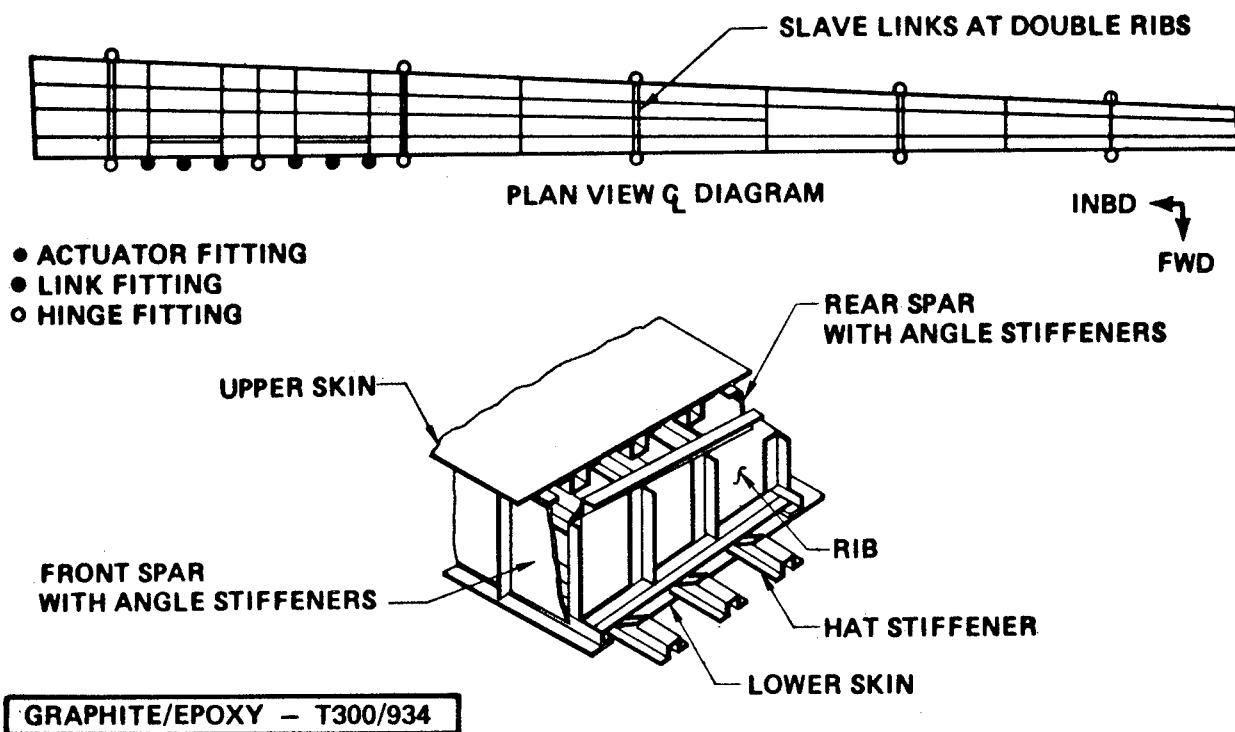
YC-14 Elevator Gr/Ep Skin/Discontinuous Stringer Design
